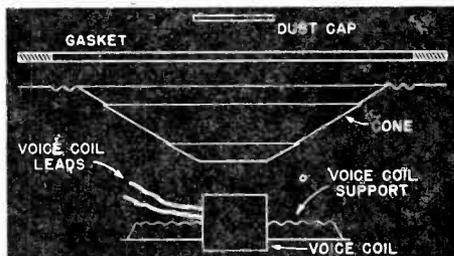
A cone and voice-coil assembly which is put together during the installation of the replacement.
